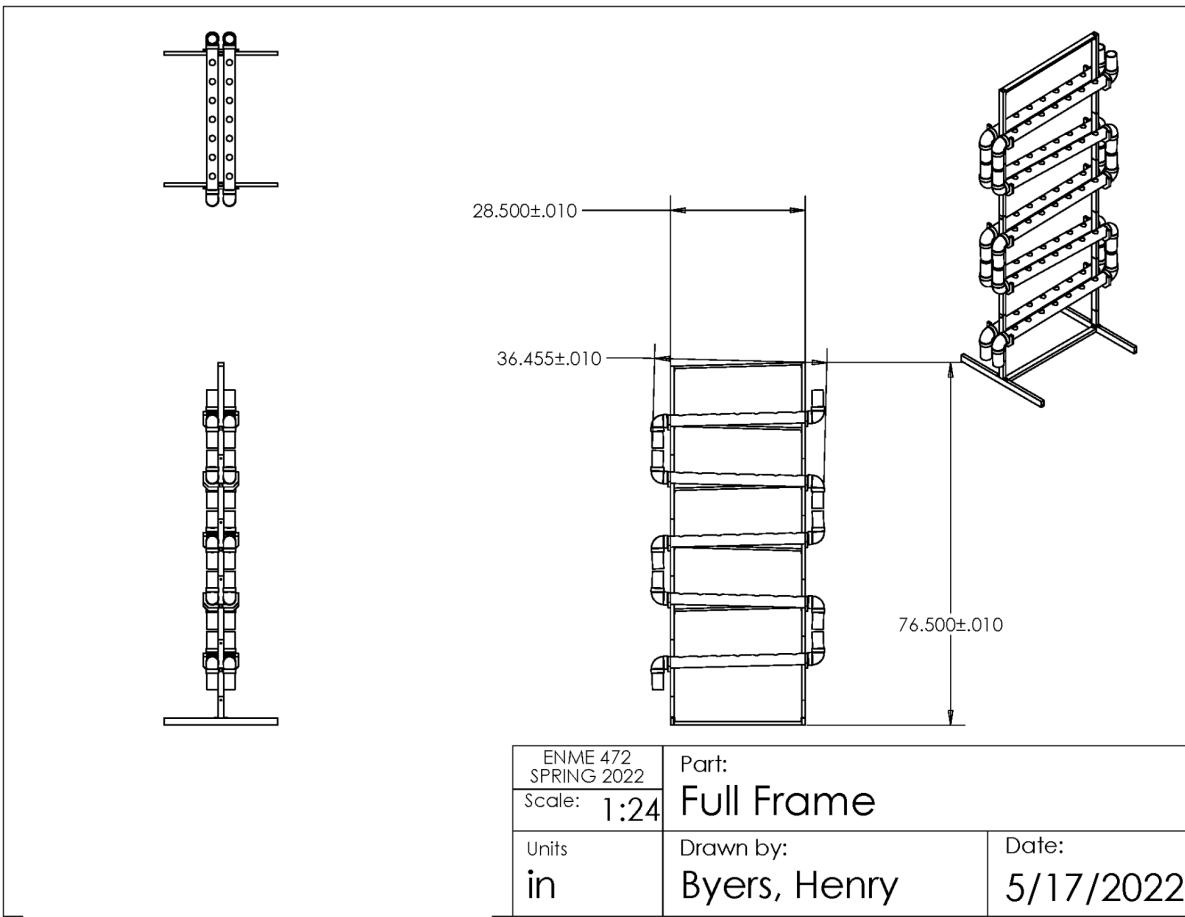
Engineering drawing for the fully assembled frame and grow tubes
